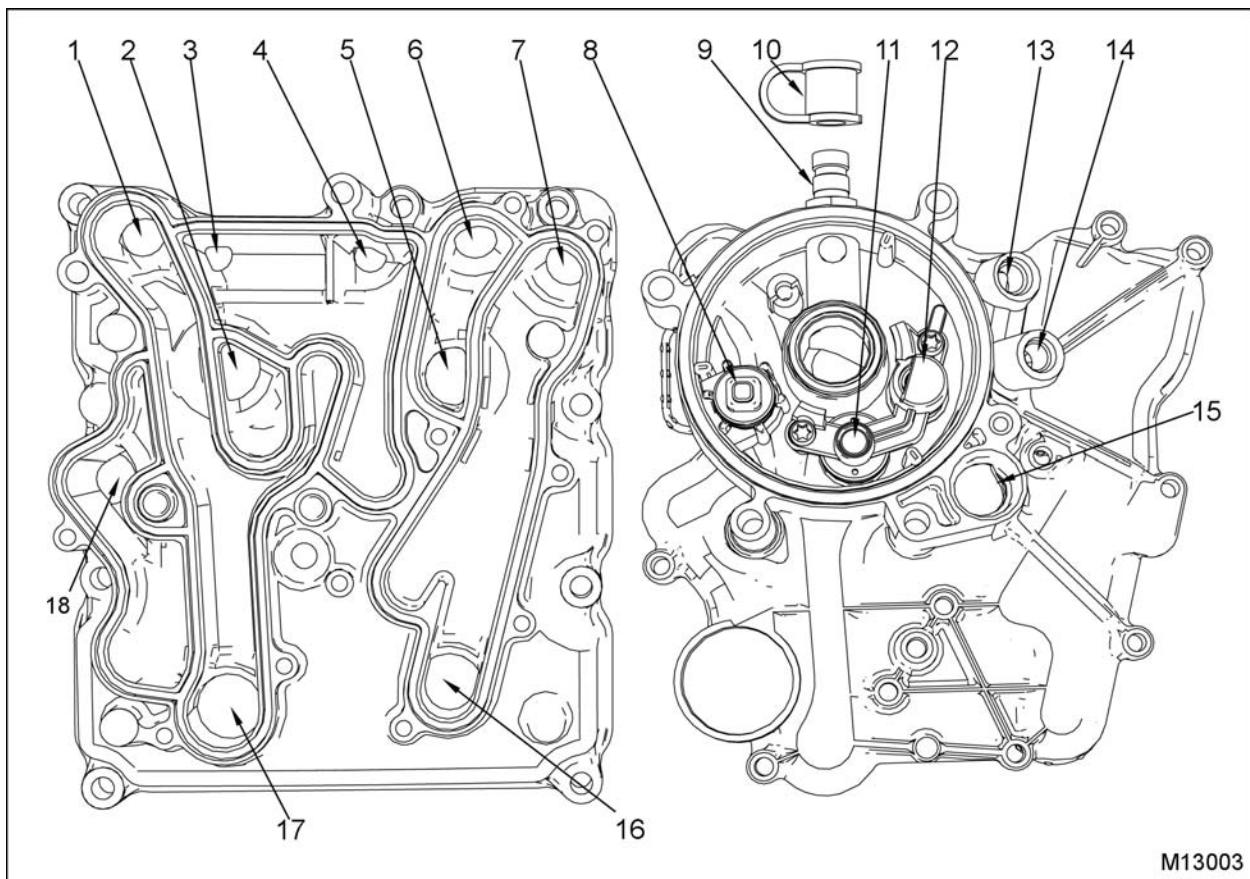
Oil cooler cover assembly and oil filter base assembly location details
